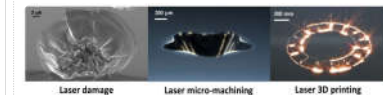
Examples of laser damage (left), laser micro-machining (center) and laser-based 3D printing.
